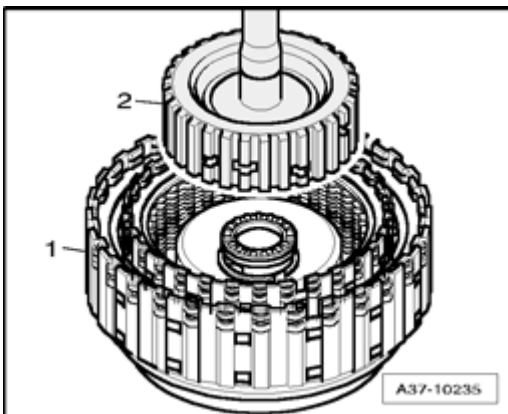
Intermediate Shaft With Inner Plate Carrier "A" And Clutch "A/B"
